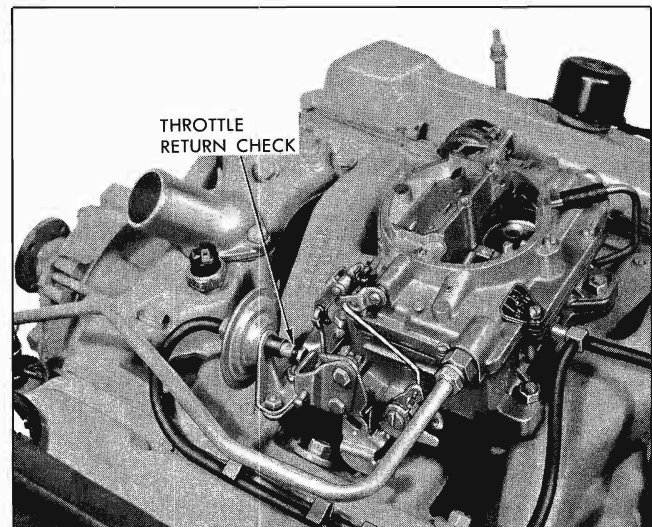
B-3 Throttle Return Check Hook-up for Super Hydra-Matic Four Barrel Carburetor
